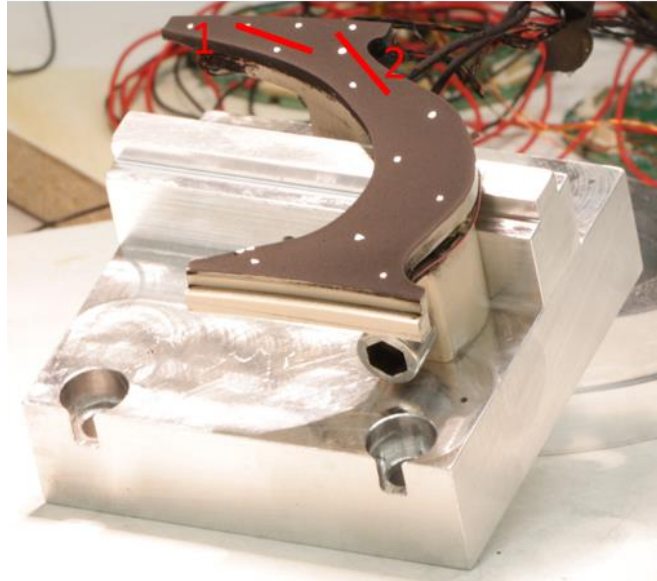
location of roughness measurements on the rotor endwall (highlighted in red) before heat transfer platform assembly in rotor.
